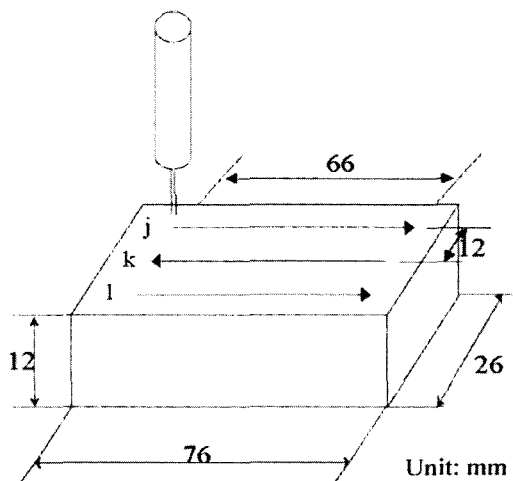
Gas metal arc(GMA) welding for producing the abrasion wear specimen.
